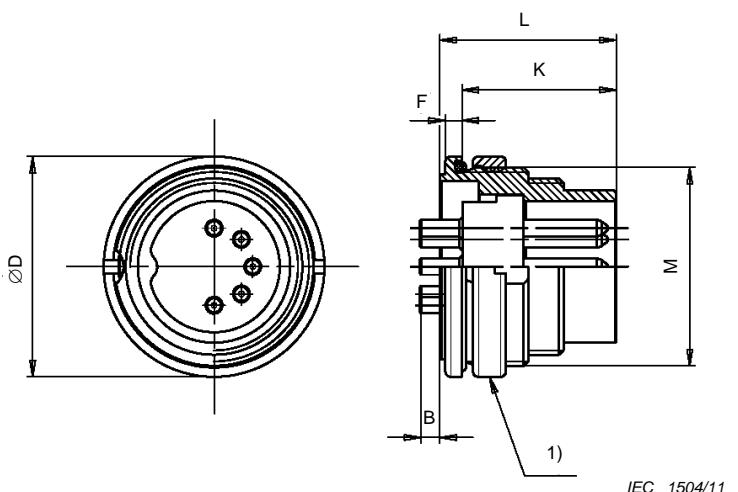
Fixed connector, male contacts, IP65/67, front mounting
